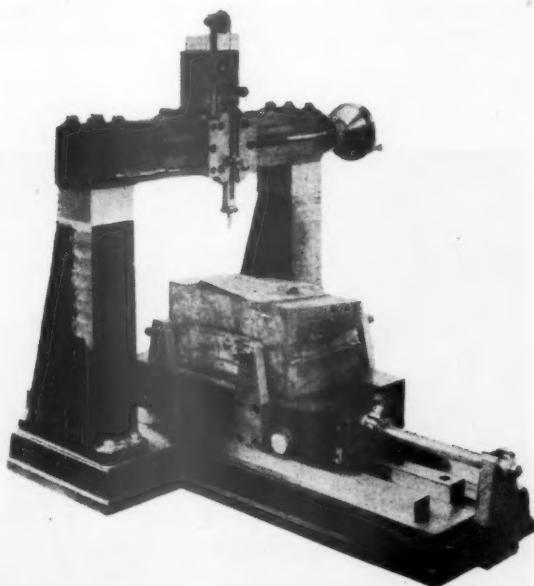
Smoked glass aerofoil inspection fixture.
